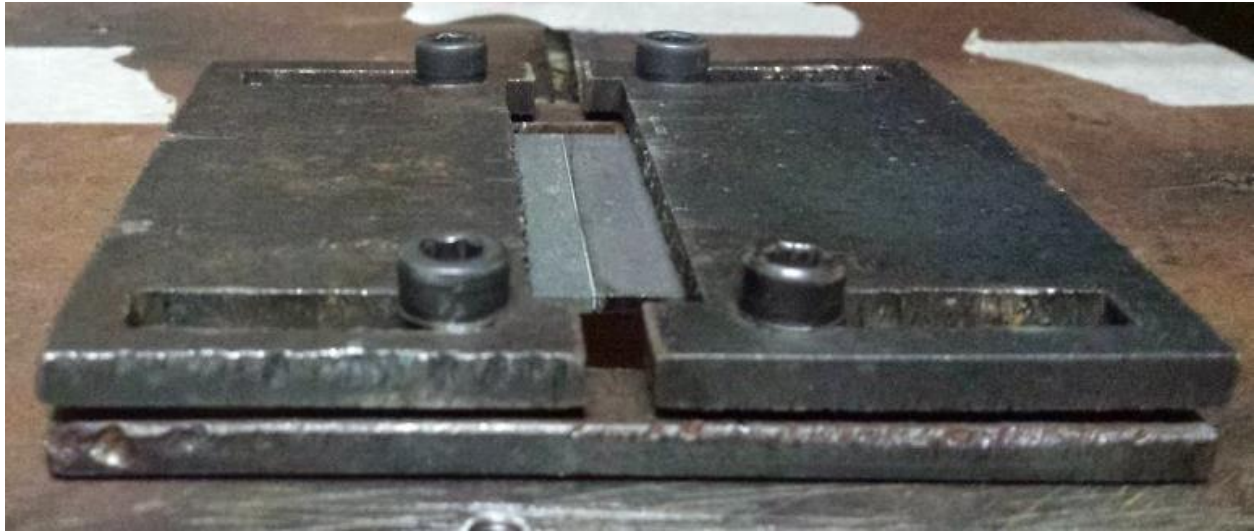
Fixture used for clamping samples during laser welding
